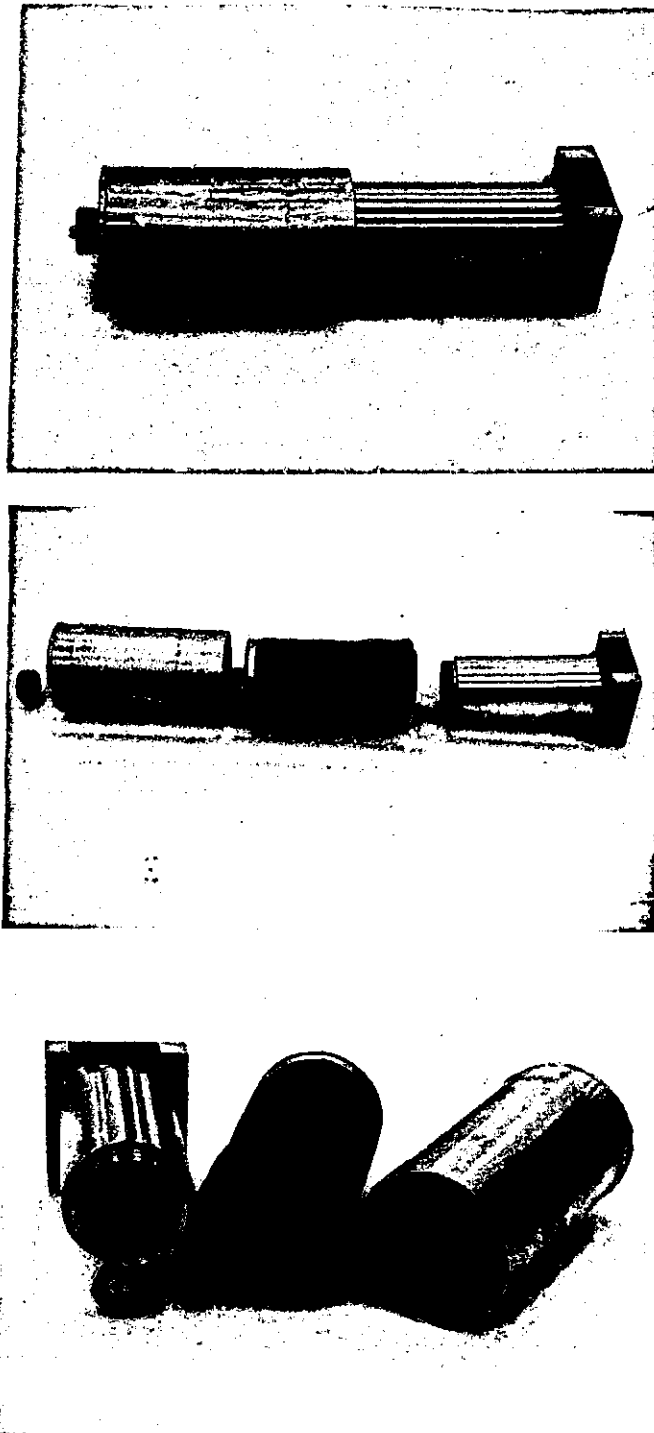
Prototype of roll-up sleeve damper/spring. Top: Assembled with 25 mm (1 in) foam pad. Middle: Disassembled into sleeve cover, sleeve, and air-filled cylinder. Bottom: View shows porous plate in end of air-filled cylinder.
